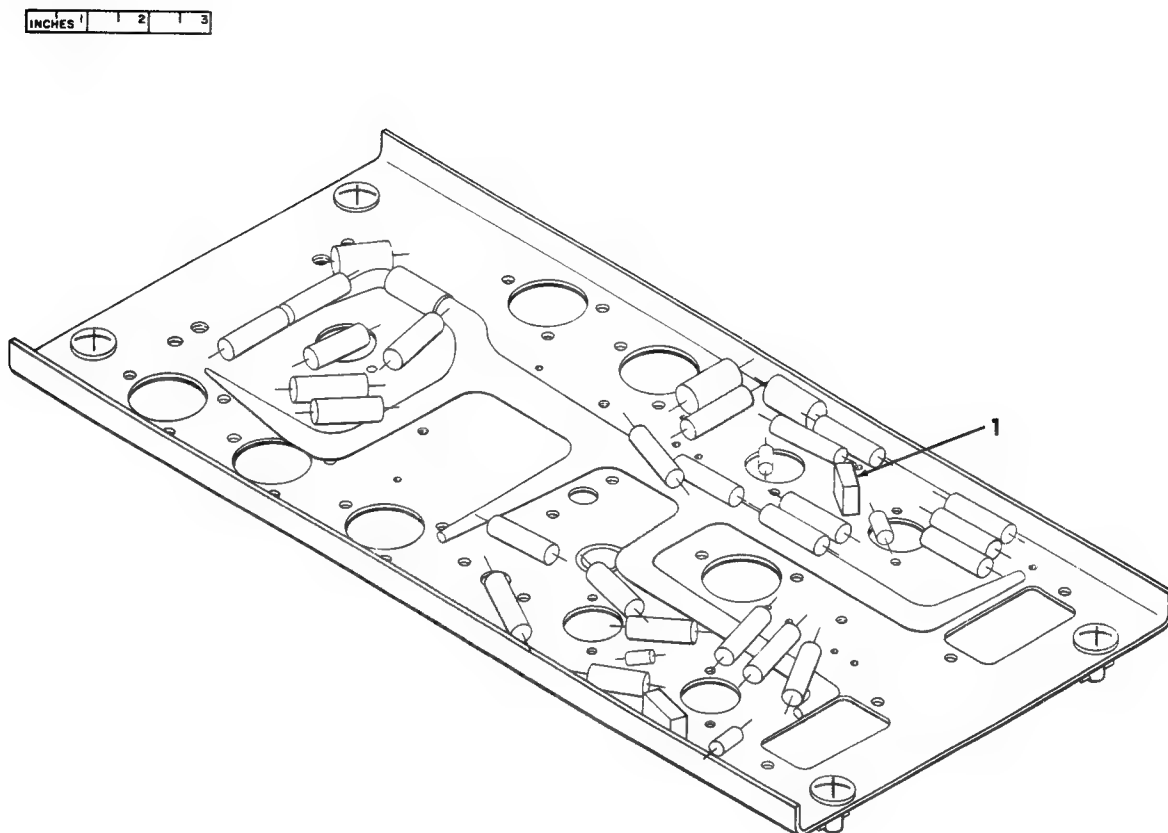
Amplifier, electronic control (9993034)—partial exploded view
